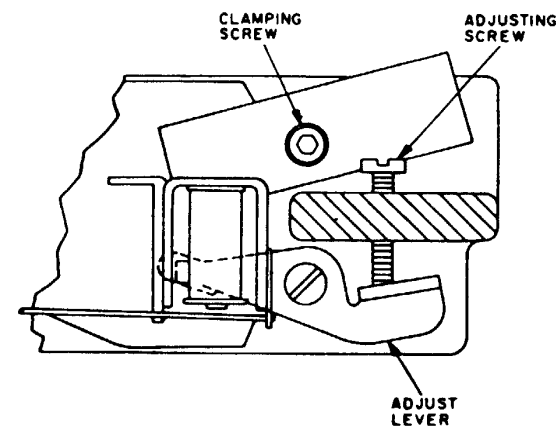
Capstan drive mechanism requirement. TM7440-222-15-192
